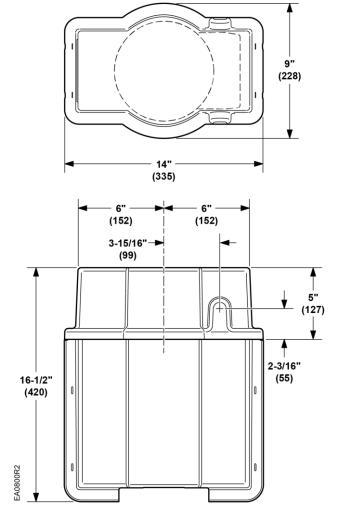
Dimensions of the 599-10065 Weather Shield in Inches (Millimeters).
